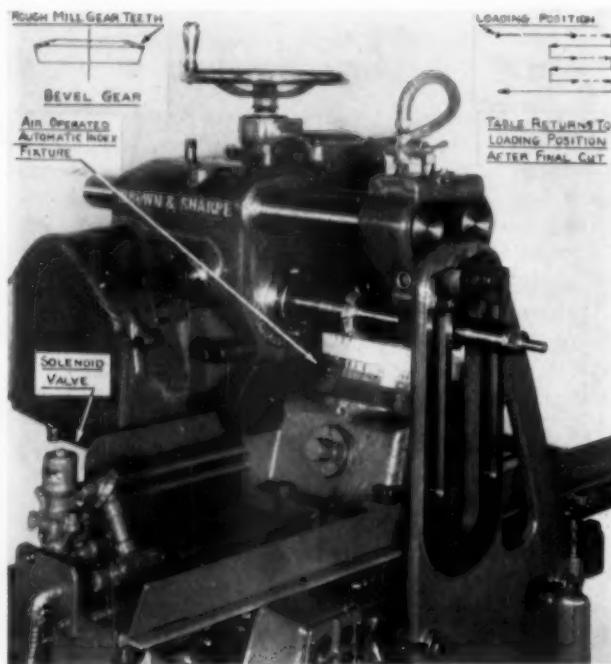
A special automatic air operated fixture for rough milling bevel gear teeth at a single pass.
